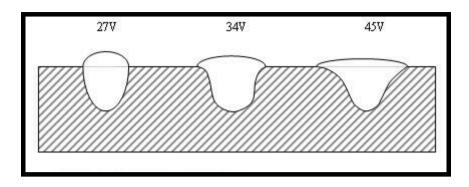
Schematic depth of penetration in SAW bead with varying weld voltage
